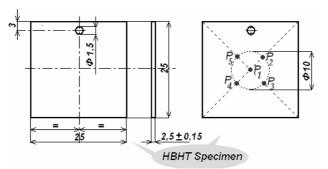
Configuration and dimensions of the specimens used for HBHT
